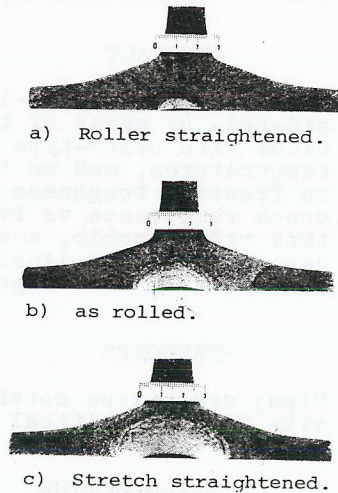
Fracture surface depending on straightening (grade 90).
